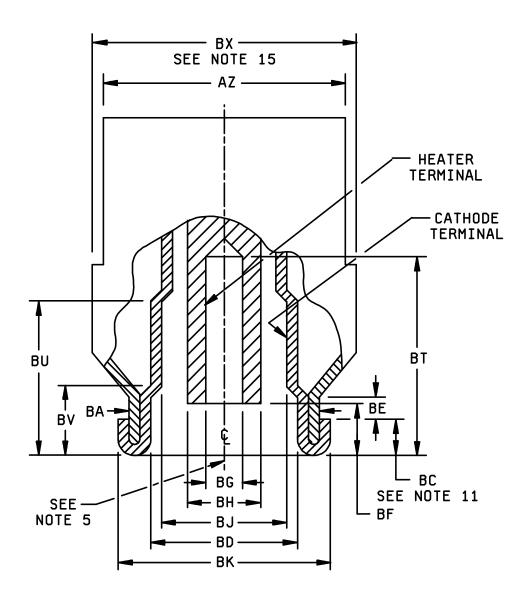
Outline drawing of electron tube type DOD-042 (detail enlarged).
